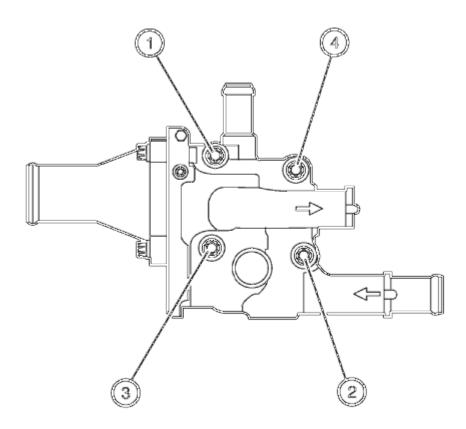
Engine Coolant Thermostat Housing Courtesy of GENERAL MOTORS COMPANY
